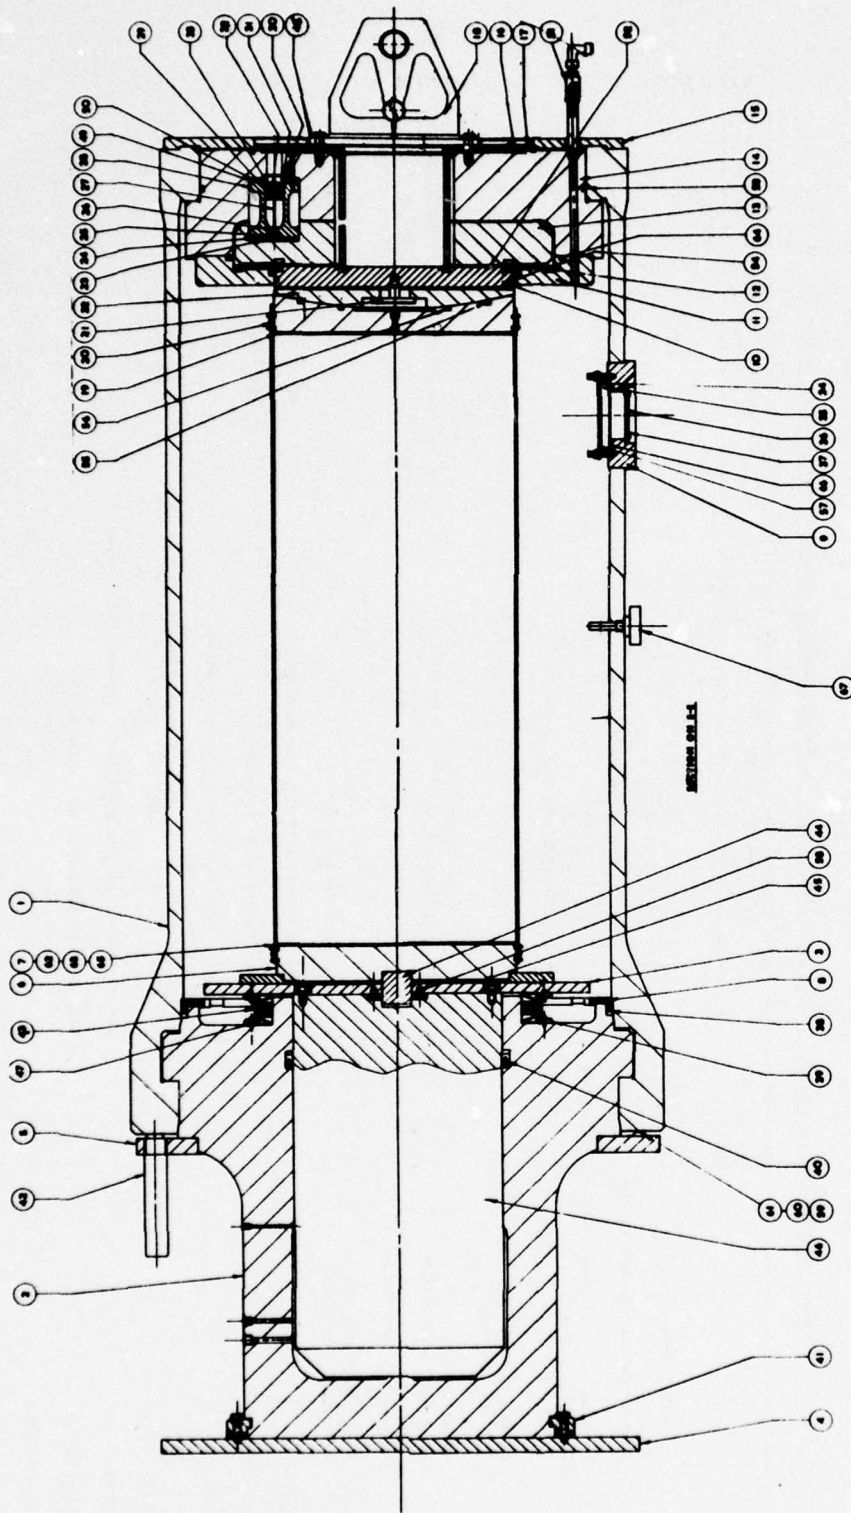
Triaxial apparatus for 24-in.-diam specimens manufactured by
